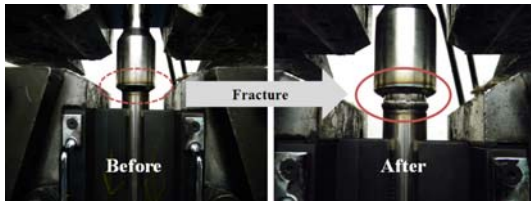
Fracture(Tension) Test of Weld Part
